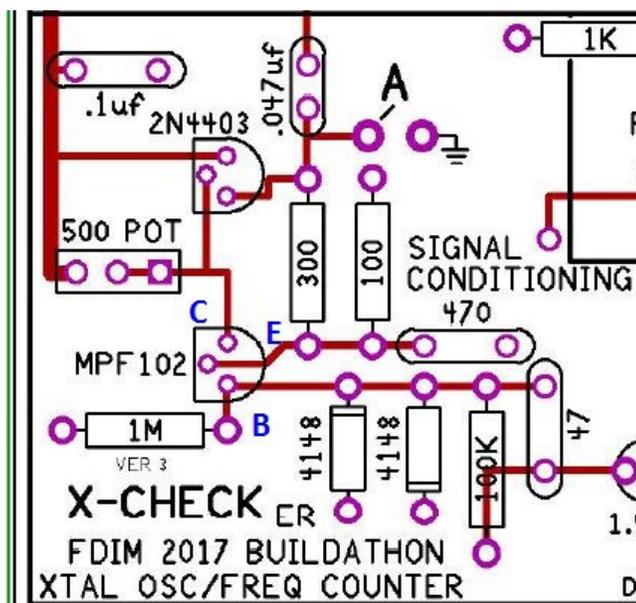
Expanded View of the MPF102 JFET locatdion on the X-Checker PCB
